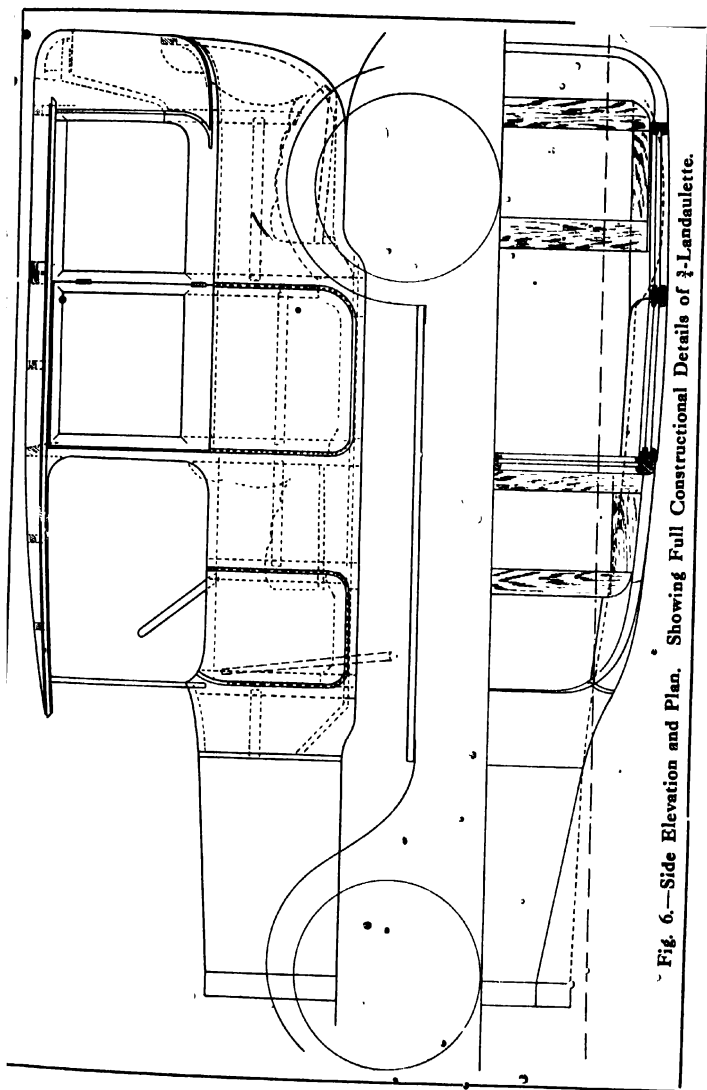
Side Elevation and Plan, Showing Full Constructional Details of 3-Landaulette.
